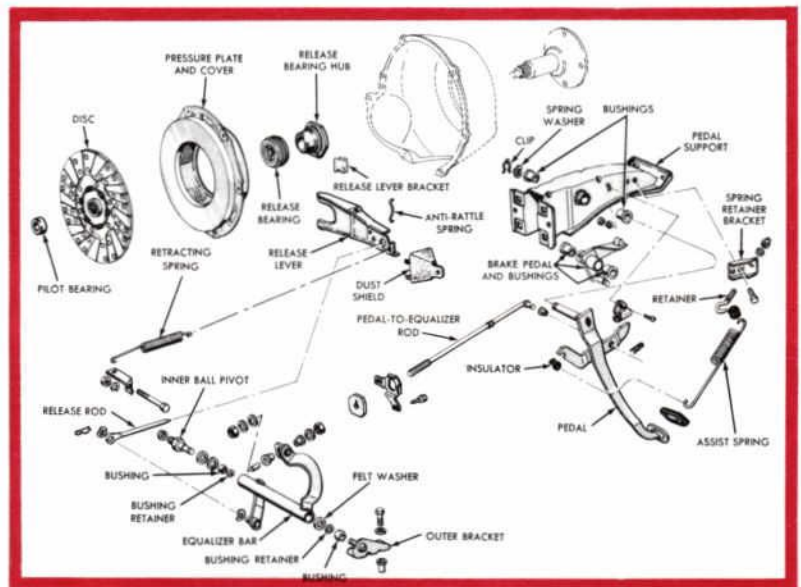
Fairlane Clutch And Linkage Assembly Parts Identification
